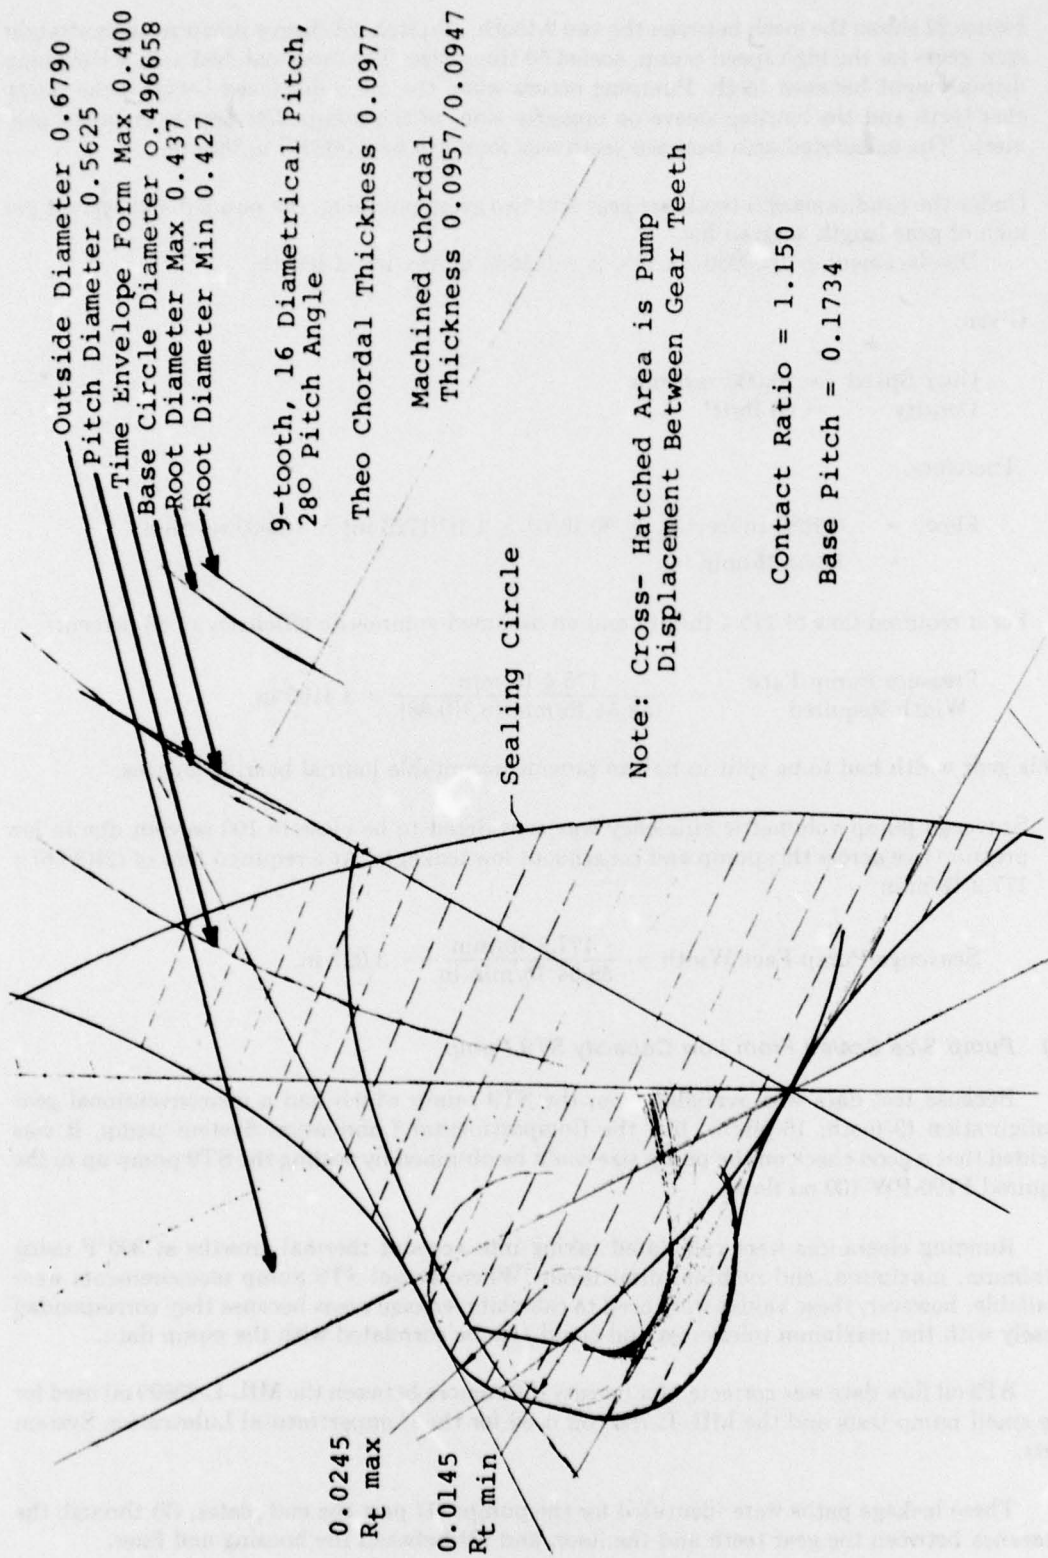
Compartmental Lubrication System Pump Gears 50 Times Size
